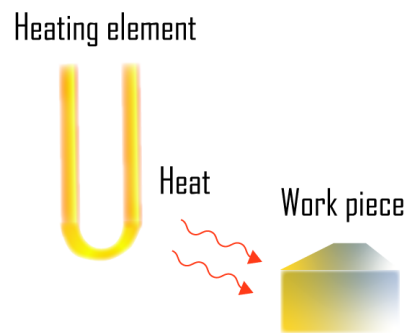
The principle of heat treatment whereby a work piece is heated using electrical heated heating elements.
